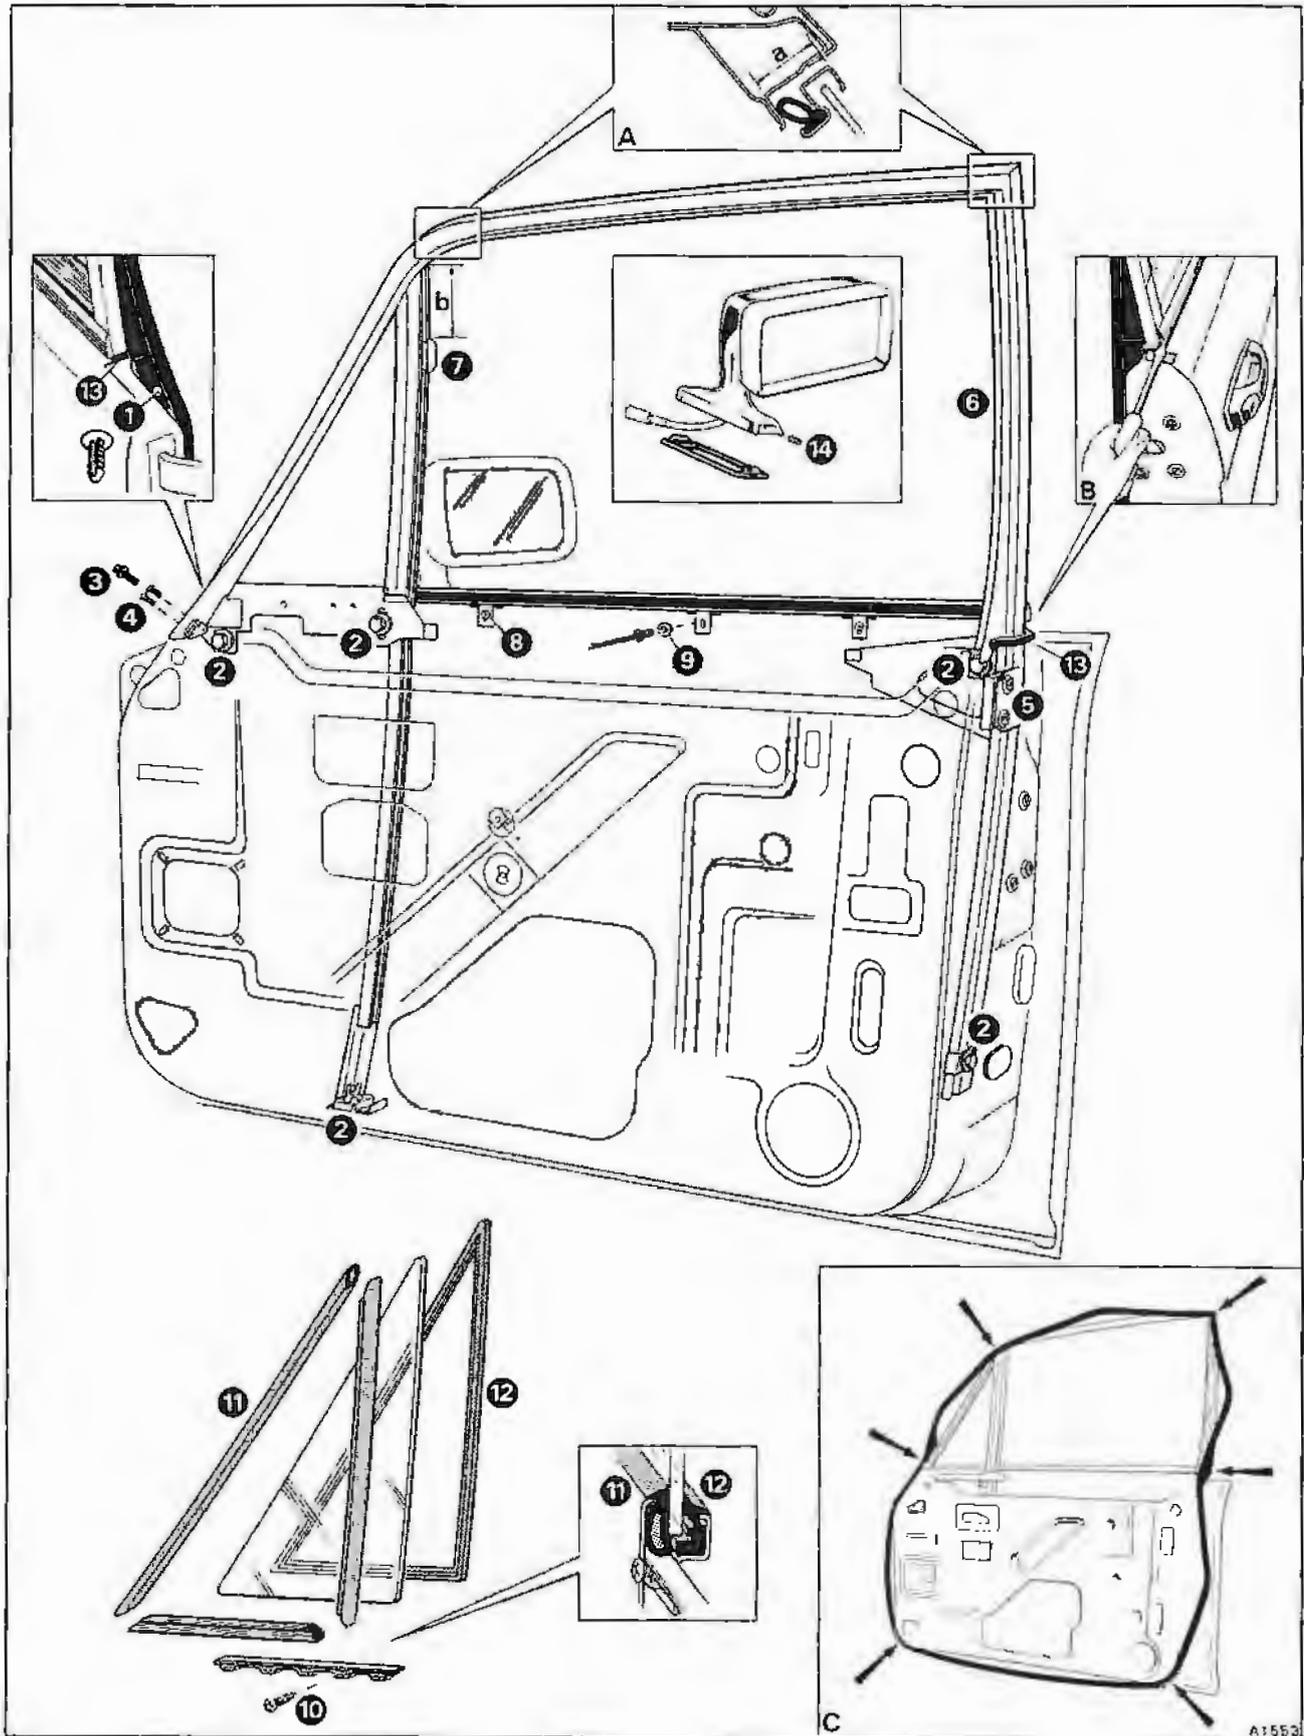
Door frame, door to body seal, quarter glass sealing arrangement, and fittings
